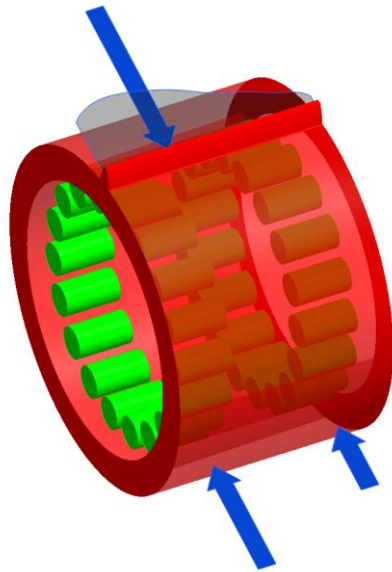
Schematic of a loaded tooth on a spur planet gear with typical integrated cylindrical roller bearings. A displaced contact load distribution causes an uneven load sharing on the bearings.
